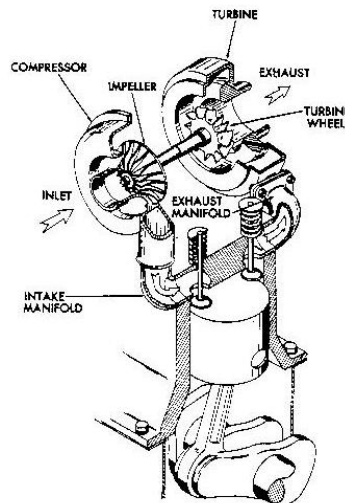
Simplified drawing of turbocharger and engine cylinder.
